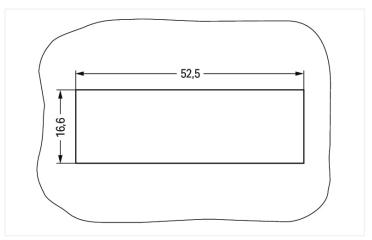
Plate thickness: 1 ... 3 mm Cutout tolerance: + 0.1 mm
